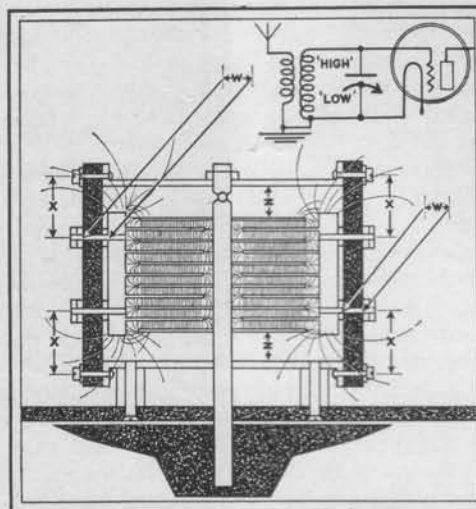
Theoretical Sketch (cross section), showing how losses are held low. Note that the shaft and rotor plates are one side of circuit and are grounded to end plates. The stator plates are supported by screws (refer to Fig. 1), which hold the plates (B) into which the plates are swedged. These screws give no real contact to the rubber, but the inner seating washers (C) and the outer lock nuts (E) are relatively small in surface, resting against the rubber (A). In Figure 2, the distances (W) are practically air spaced from the rubber. This reduces the amount of surface of the high (stator) side to the rubber, thereby reducing hysteresis losses to a minimum. The intensity of the field is indicated by the fine curved lines between the plates and the stray field by the fine curved lines. Note that the blocks holding the stator plates act as shields to keep the stray fields out of the rubber. Also note that the distance (X) is relatively large and affords an extremely high resistance path to the currents which might tend to leak across the rubber. The distances (Z) permit a low minimum capacity as does also the plate spacing between rotor-shaft elements and stator plate edges.
